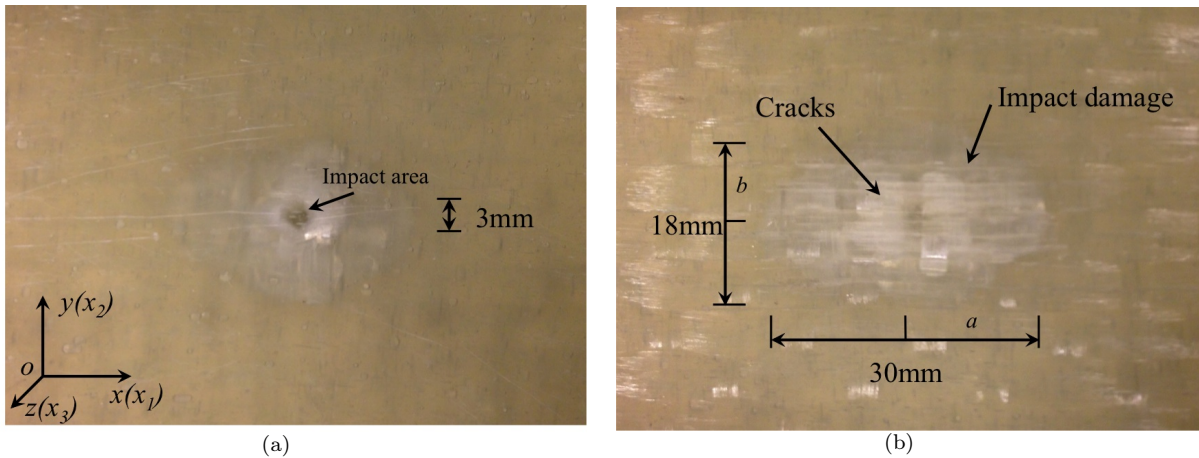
Photography of the impact damage in the glass-polyester composite plate. (a): Impact surface with circle shaped damage; (b): Back surface with elliptical damage.
